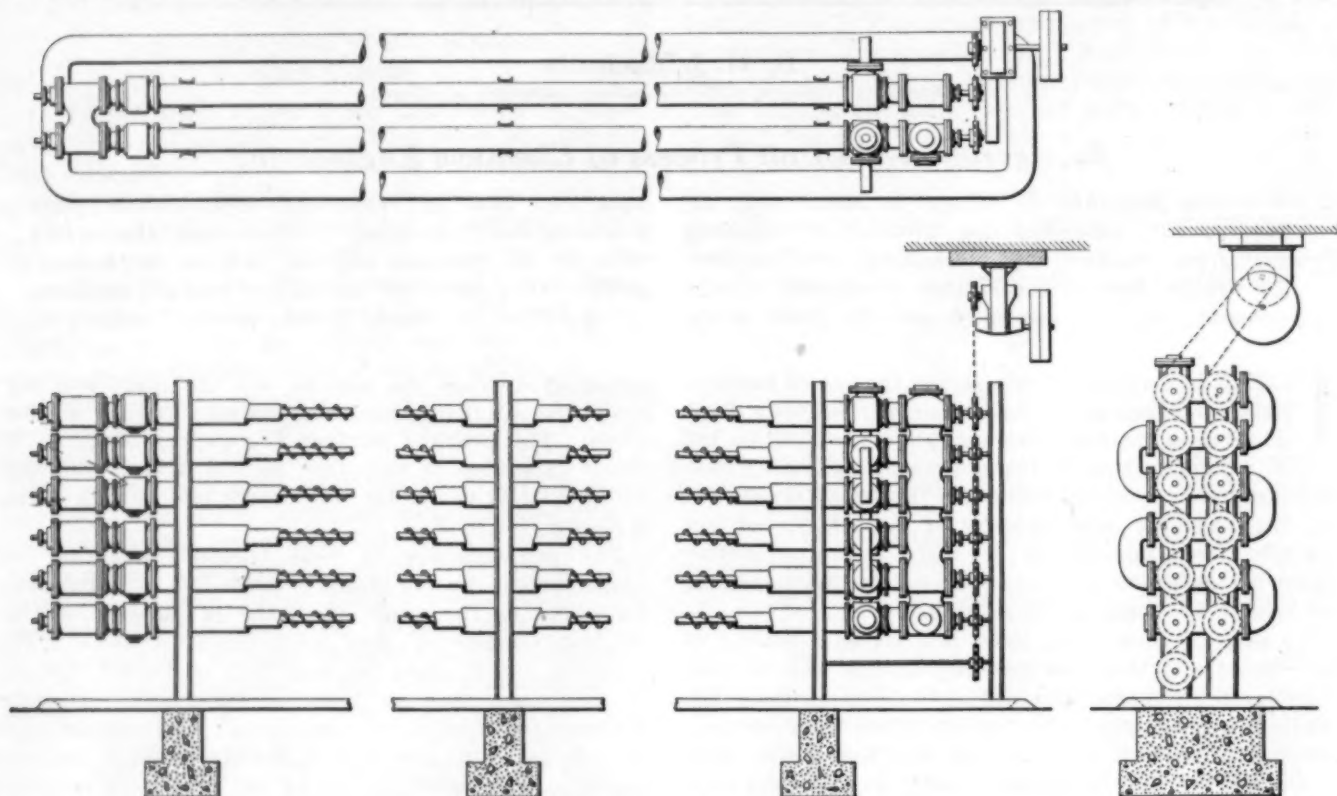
Double Pipe Oil Cooler for Paraffin Removal
